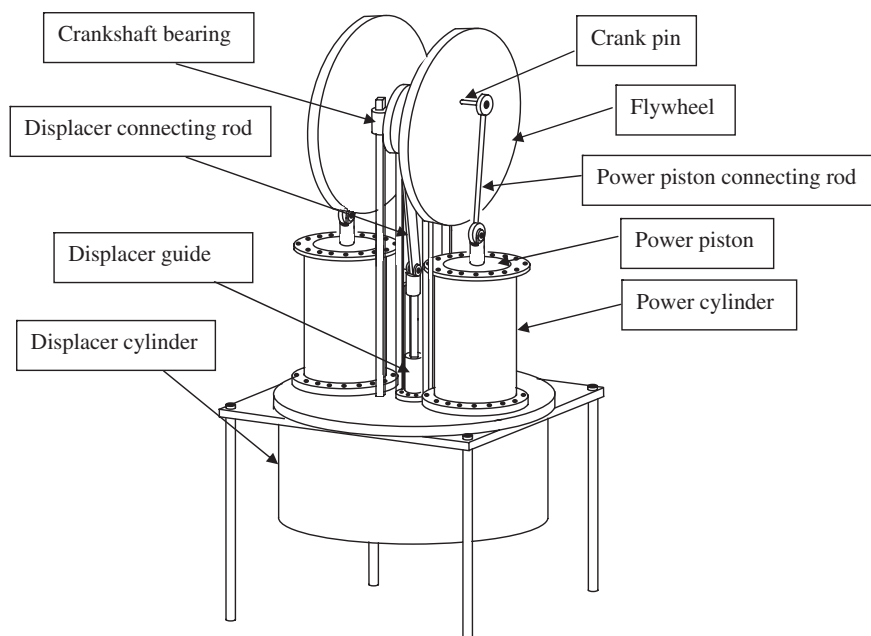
Schematic diagram of the twin power piston Stirling engine.
